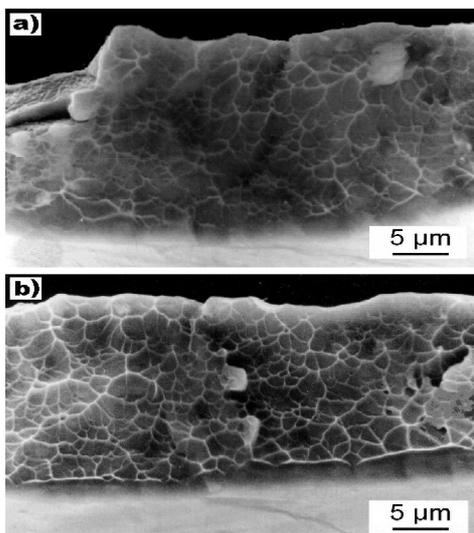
Ductile fracture surface morphology at 0.75 K — shear failure (a) and fracture morphology at 77 K with shear band near fracture surface (b).
